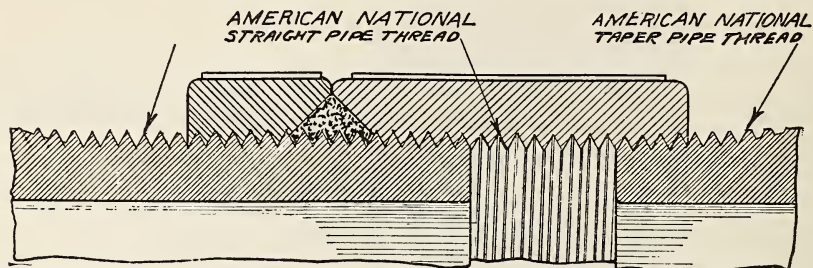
Illustration of "long screw" joint between straight threaded coupling and taper threaded pipe.
